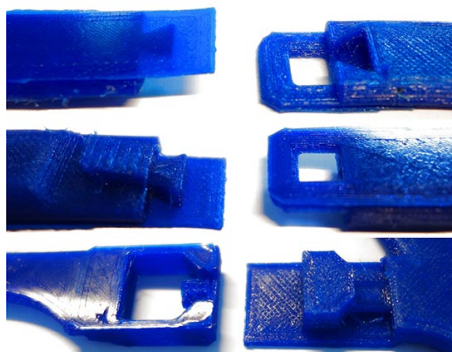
Lock designs for the assembly of the socket. Lock A is shown in the top two pictures while Lock B can be found in the bottom picture.
